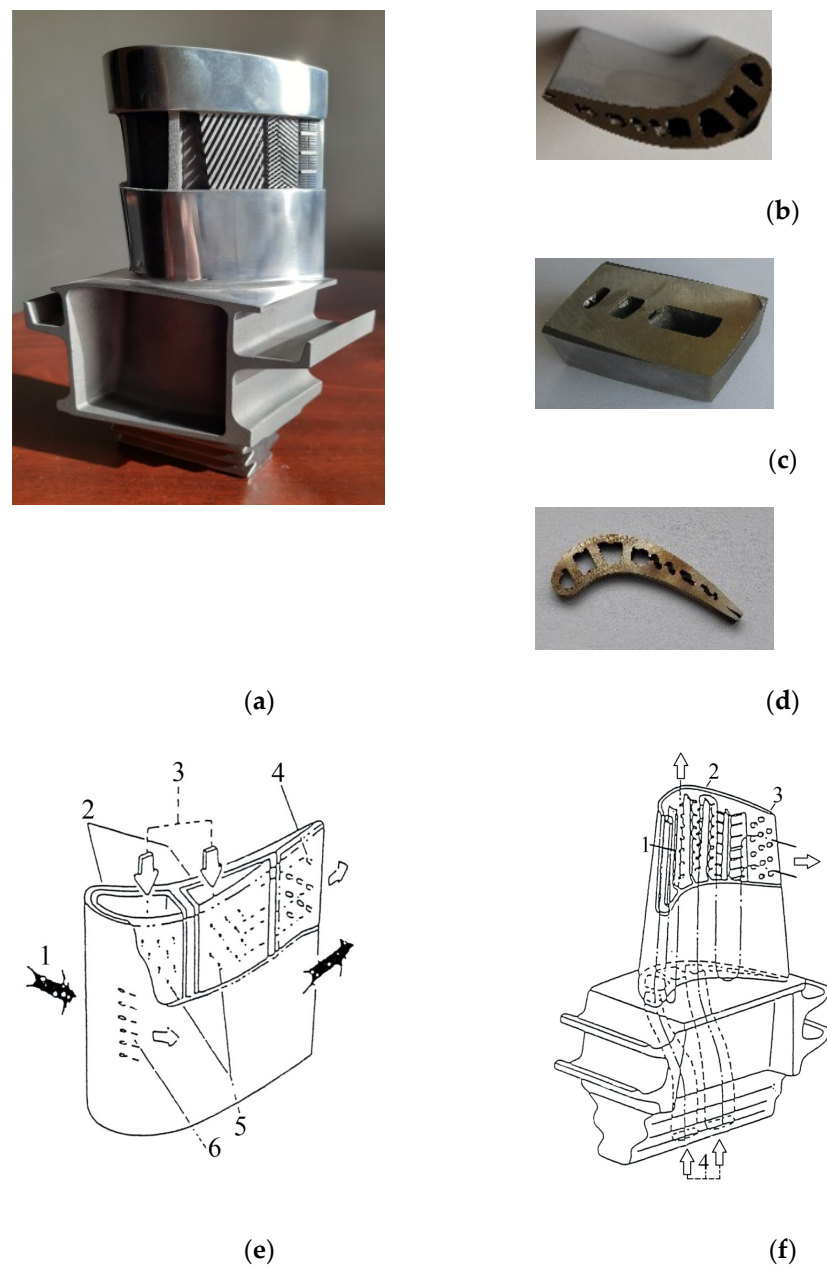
Blade of a DN80 power gas-turbine engine (a), cross-sections of its parts (b–d) and structure of the advanced cooling turbine blade: stationary blade (1—combustion gas, 2—core plug, 3—cooling air, 4—pin fin, 5—impingement cooling, 6—film cooling hole) (e); moving blade (1—turbulence promoter, 2—serpentine cooling channel, 3—pit fin, 4—cooling air) (f).
